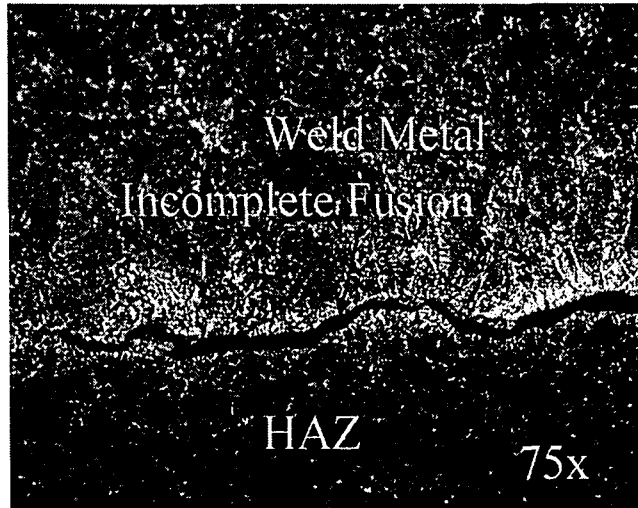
Incomplete Fusion in Specimen 36-C2-Top-right Section
